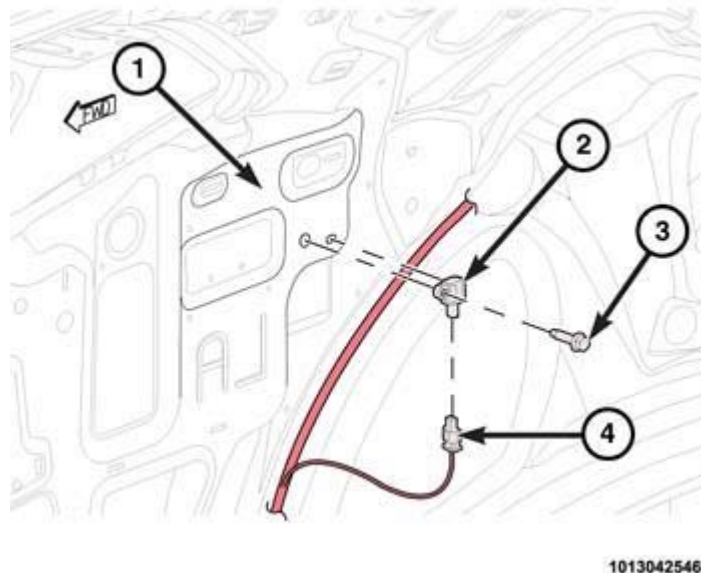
C-Pillar, Wire Harness Connector, Side Impact Connector & Screw
